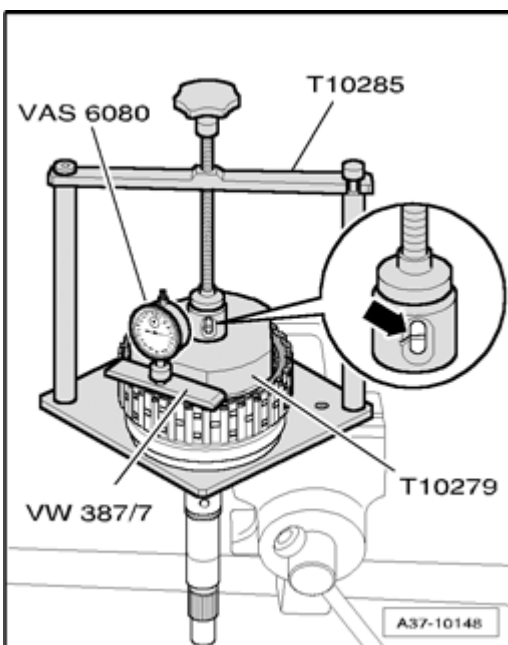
Adjusting Air Gap Clutch "A"Courtesy of VOLKSWAGEN UNITED STATES, INC.
